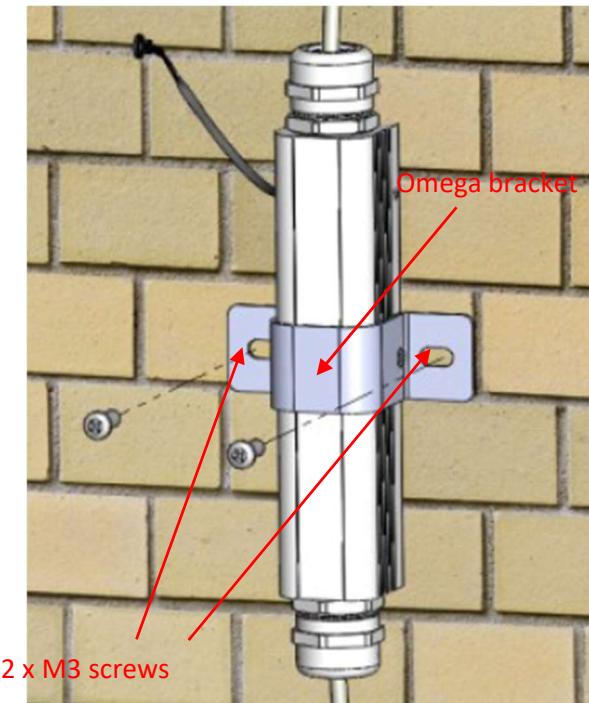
Outdoor Ethernet Surge protection – wall mounting
